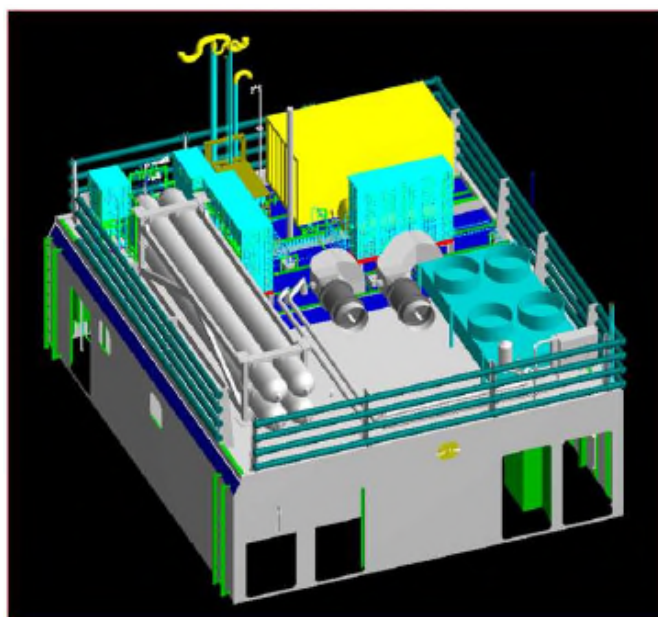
Demonstrator plant. Preliminary arrangement of deckhouse roof [128].
